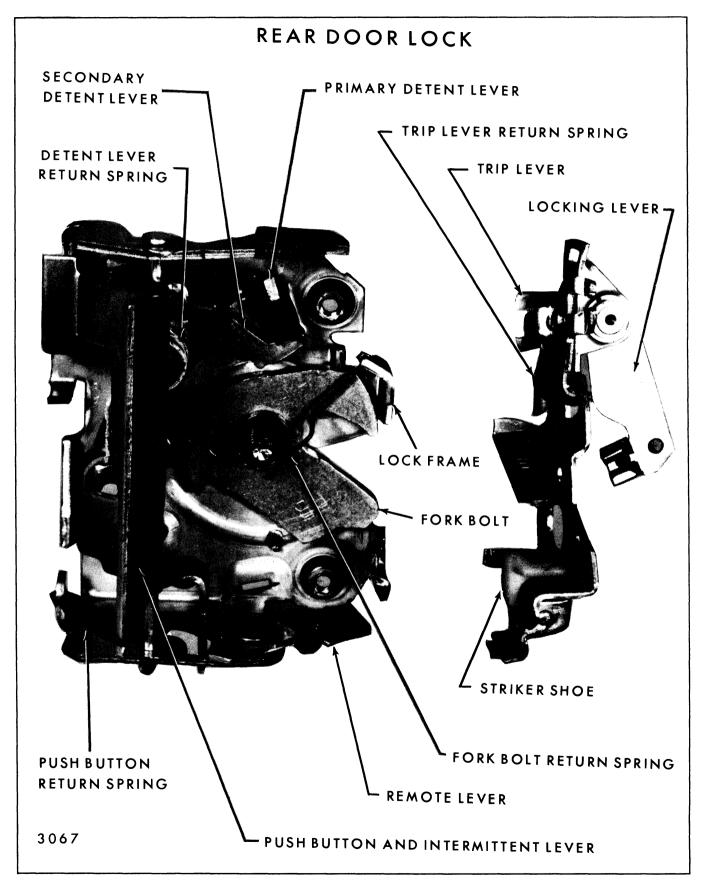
Rear Door Lock Assembly - "X" Styles
